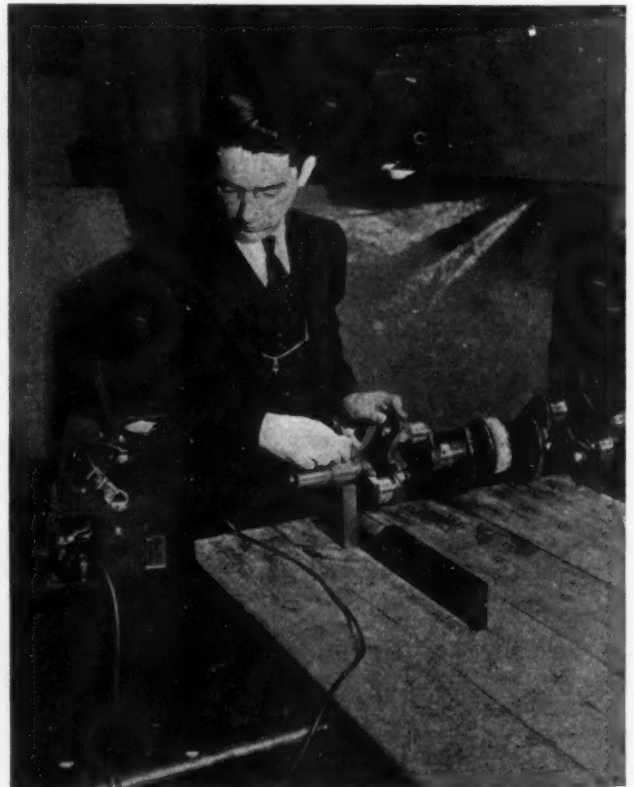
PORTABLE PROFILOMETER BEING USED TO CHECK BEARINGS ON AN AUTOMOBILE-ENGINE CRANKSHAFT
